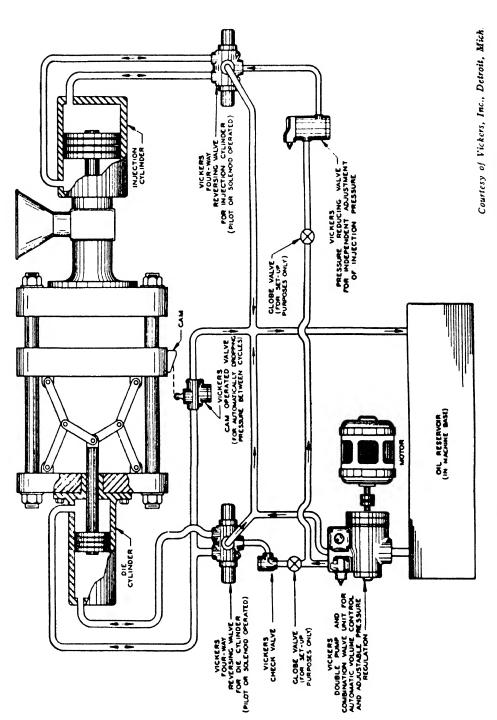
Diagram of typical hydraulic circuit for an injection molding machine.
